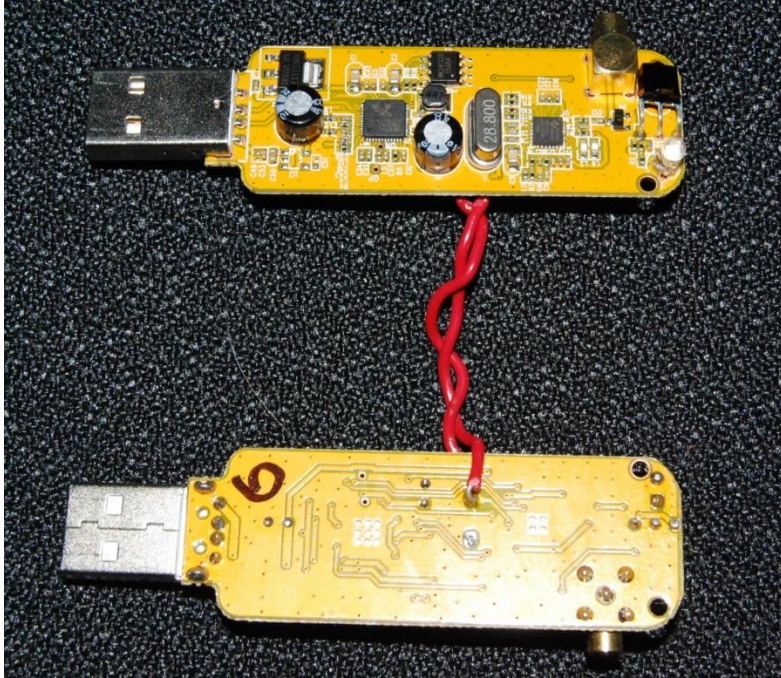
Modified Two-Channel RTL-SDR. Upper RTL-SDR Oscillator Soldered to Lower RTL-SDR.
